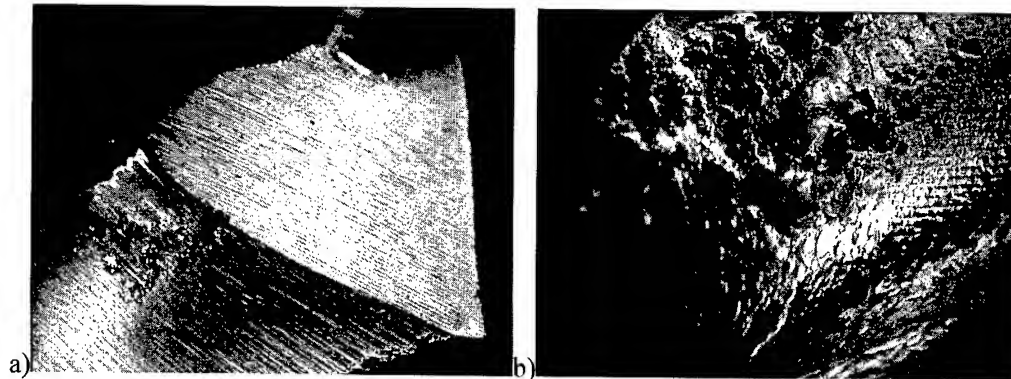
ZrN-b twist drills after machining 60mm deep holes with a feed speed of 0.5 mm/rev: a) clearance face after 160 holes, b) flute after 120 holes.
